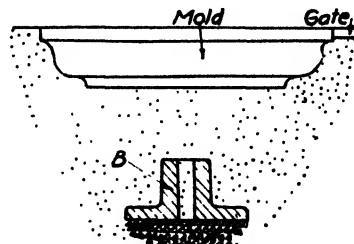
Casting and Skeleton Pattern for Sweep Molding.
